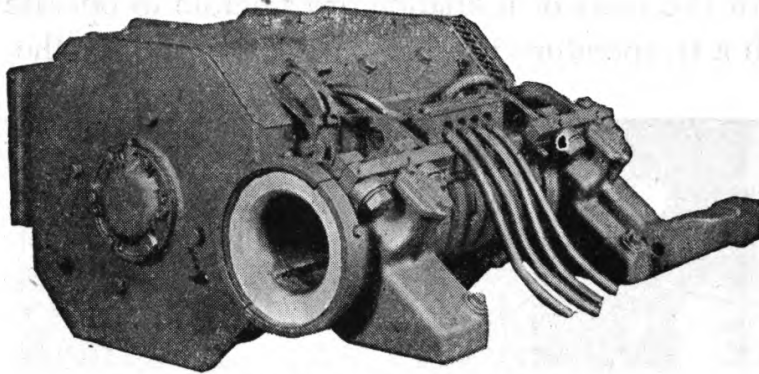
Box Frame Traction Motor Having a Welded Steel Frame
